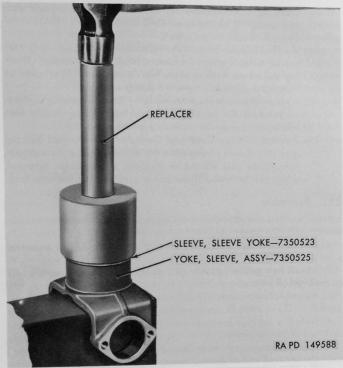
Installing yoke oil seal sleeve with replacer 41-R-2395-535.
